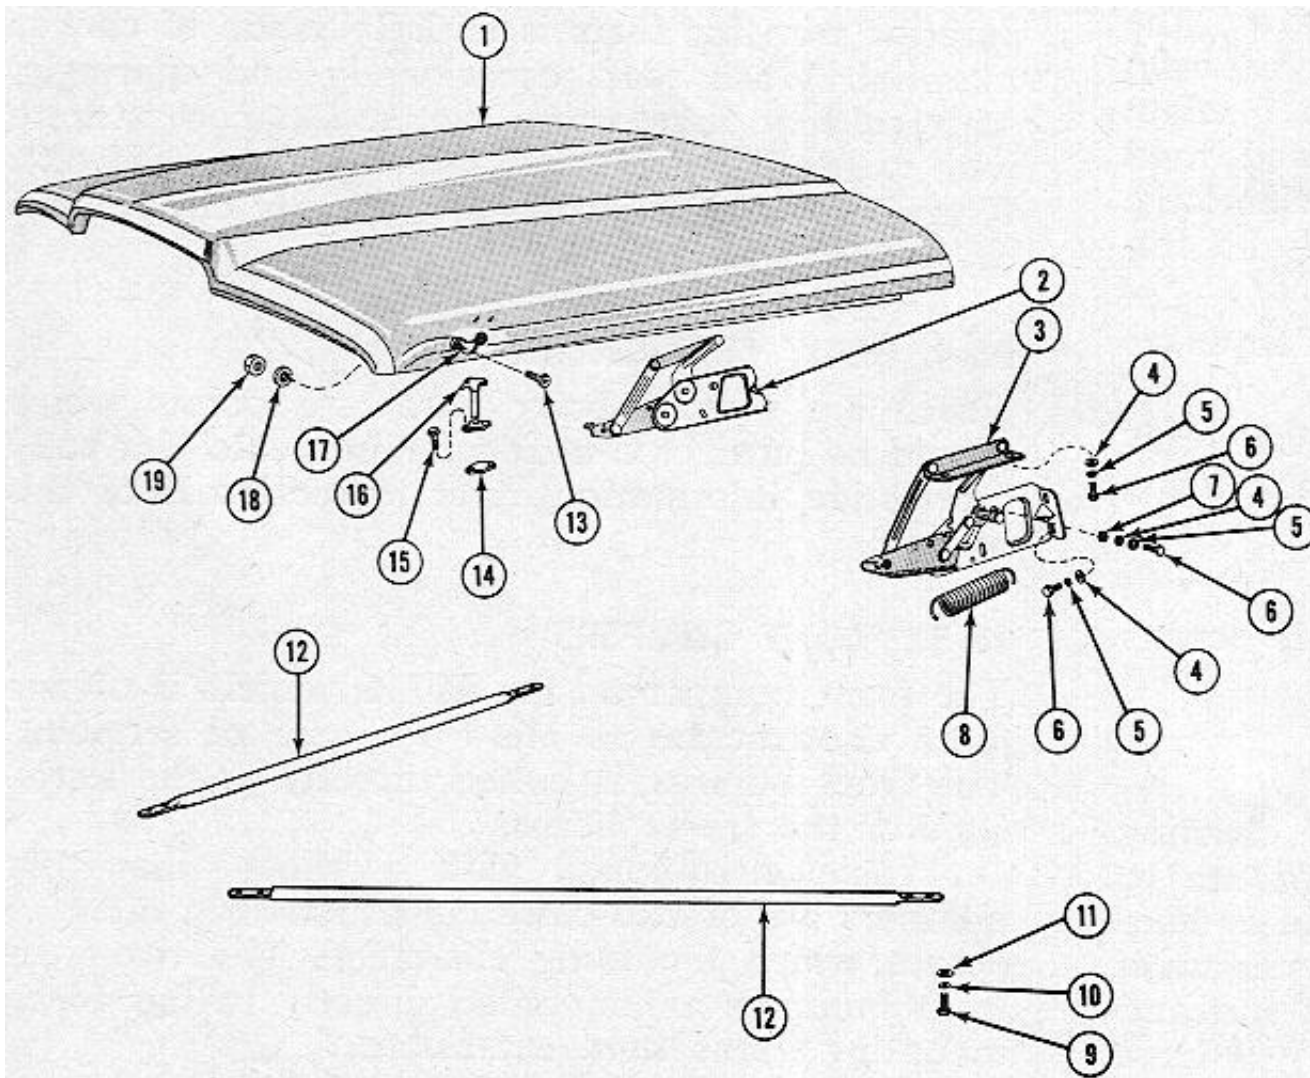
HOOD PANEL AND ATTACHING PARTS
